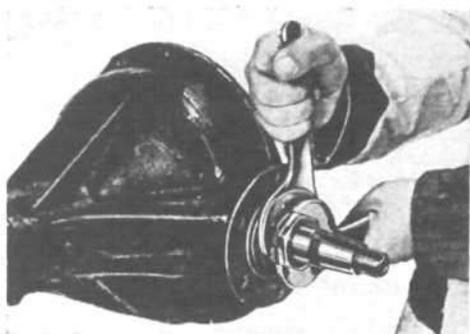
PINION BEARING ADJUSTING WRENCHES
